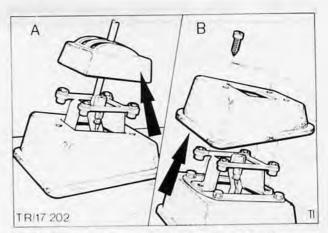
Removing selector indicator housing, and sound insulation gaiter
